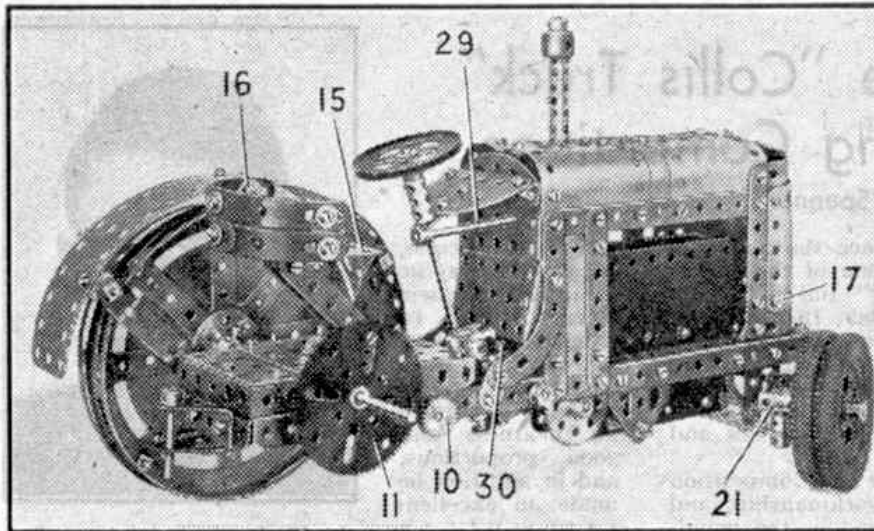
The tractor with one of the rear wheels removed to show the drive arrangement to the rear axle.
